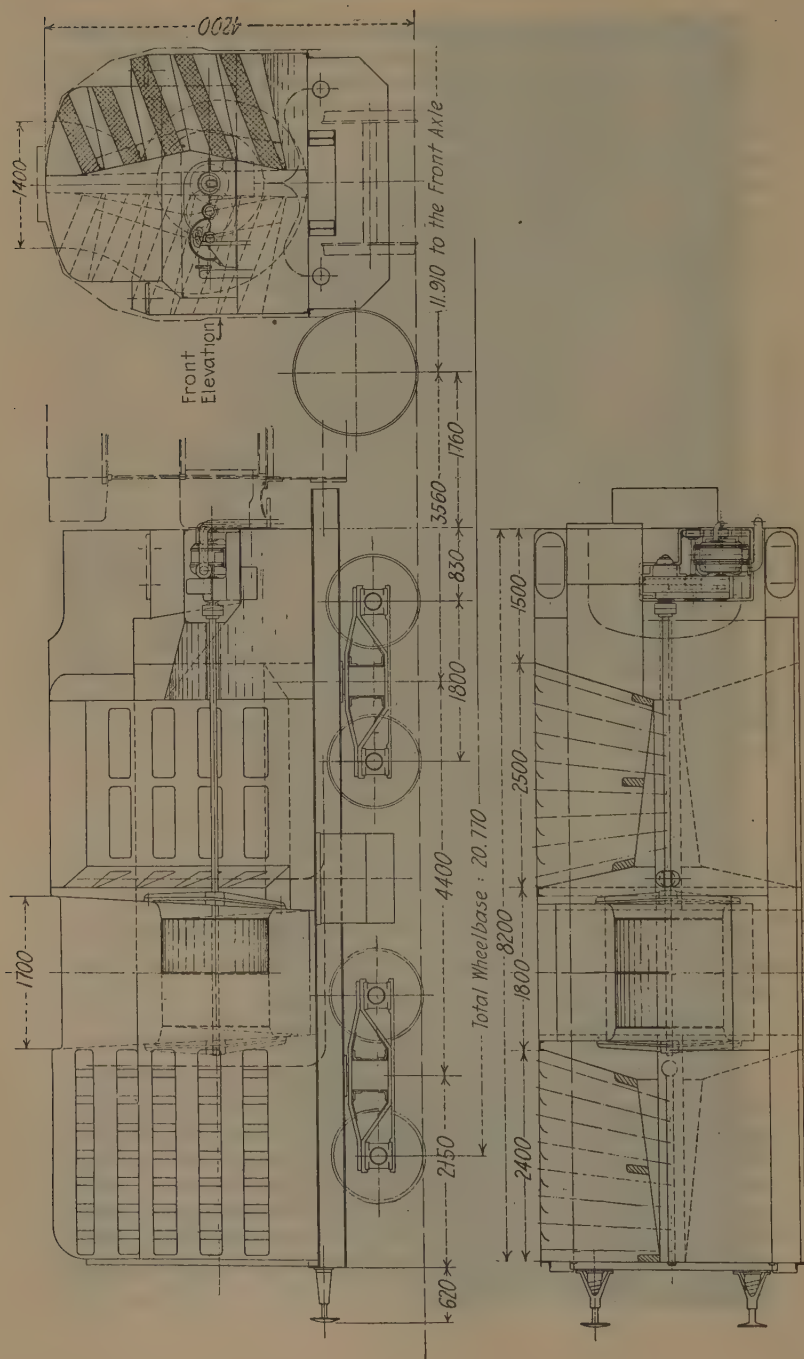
RECOOLER OF 2000-HP. TURBO-LOCOMOTIVE
